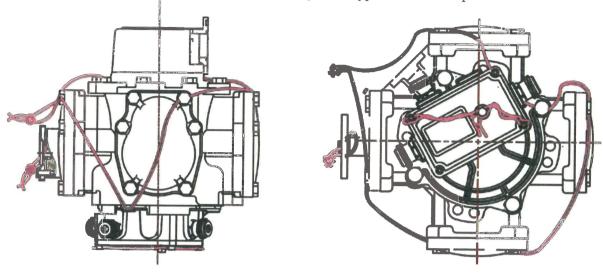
The sealing of the measurement transducer Q-Meter type 1 with Smart pulser 2
